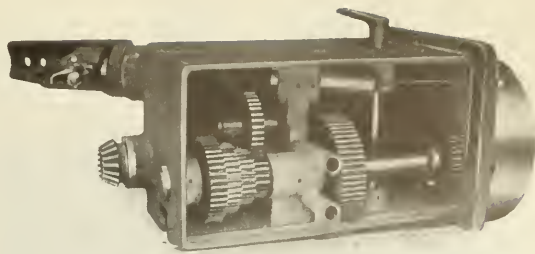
Type of Gear-box used on Both Spacing and Drilling Machines
